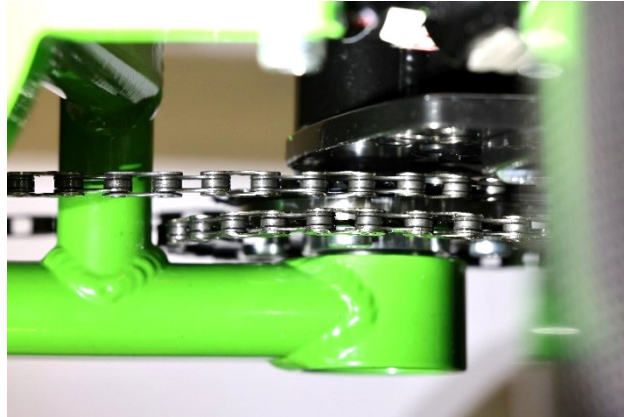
Threading the rear chain (the inner chainring is smaller)
